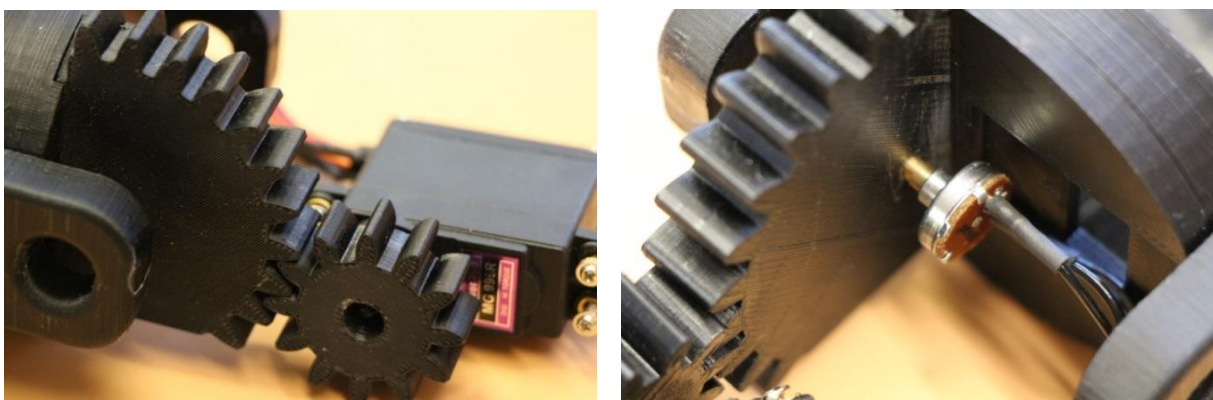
Printed elbow gears with servo potentiometer mounted in the large forearm gear
